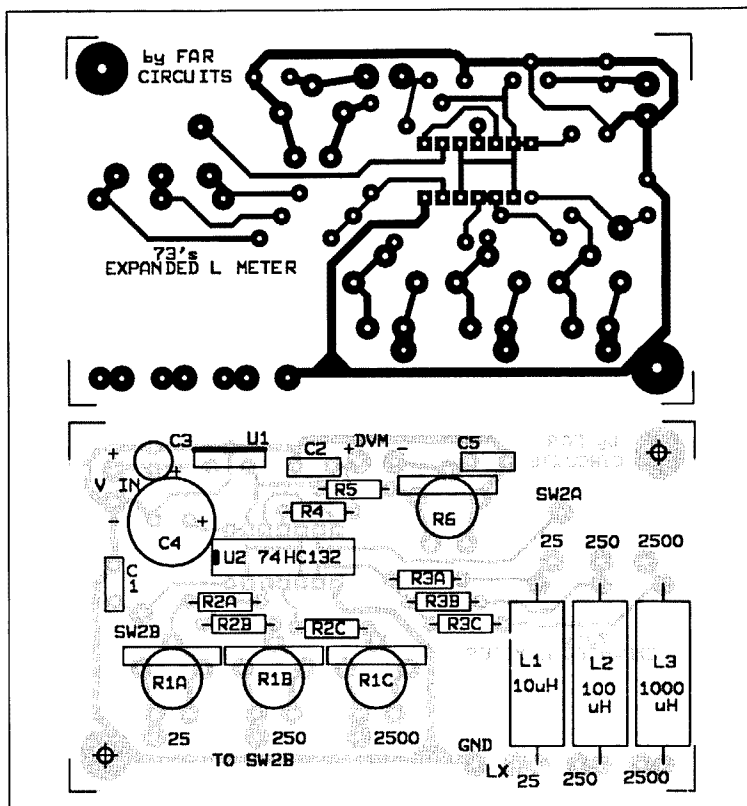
PC board pattern and parts placement for the expanded-scale direct-reading linear inductance meter.
